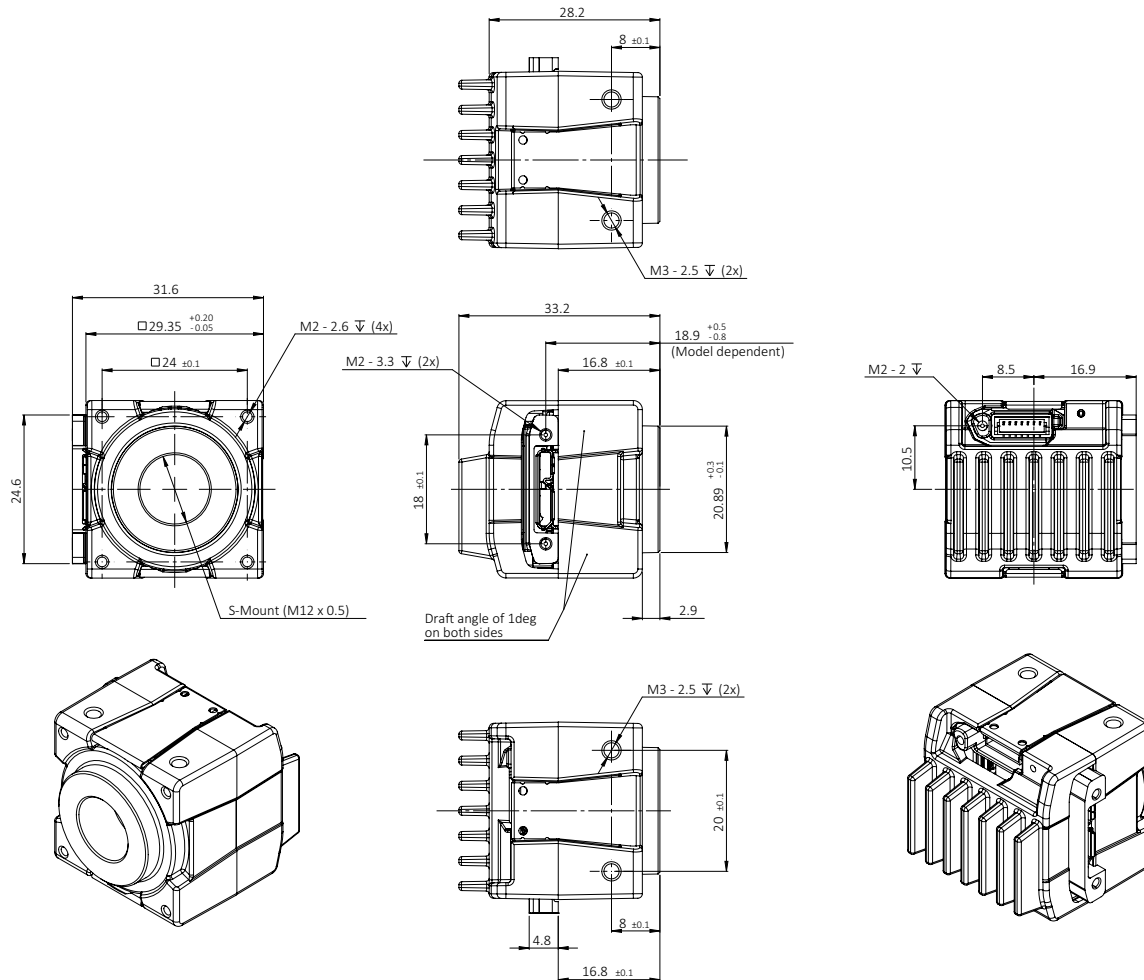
Closed Housing S-Mount 90° (standard Alvium) dimensions
